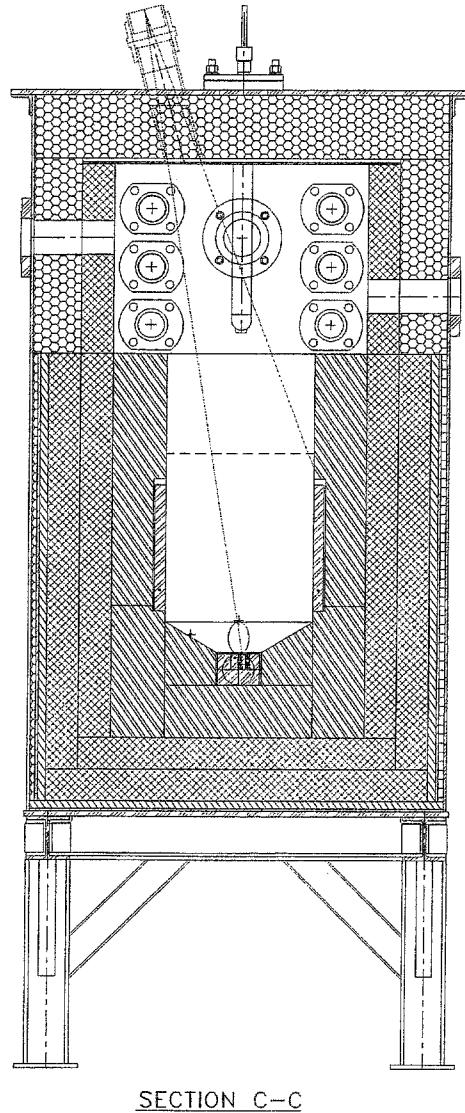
(c). Cross-section through the DM100-WV melter—Section CC.
